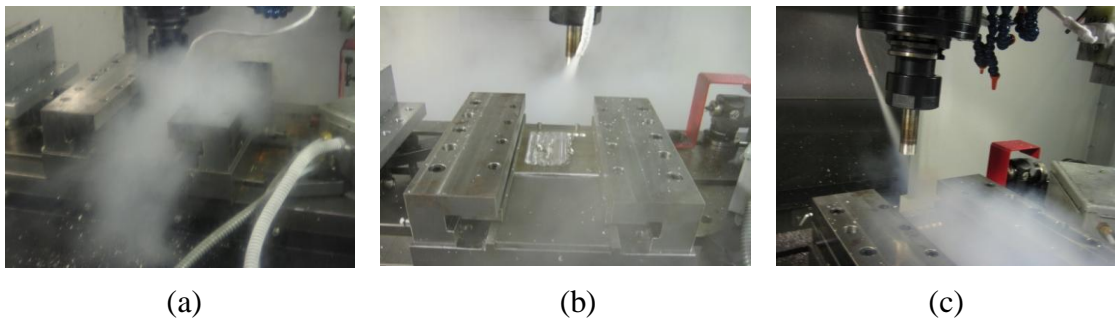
Cryogenic cooling applied at (a) side, (b) front, and (c) back of the tool sheet interface
